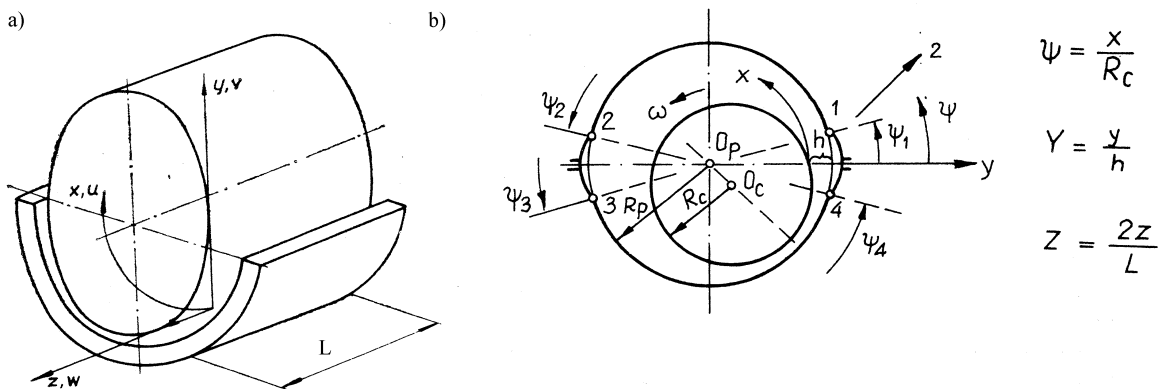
Dimensioning of cylindrical bearing [1,2]; a) coordinate system with designated speeds of grease flow, b) the way of dimensioning of grease wedge
